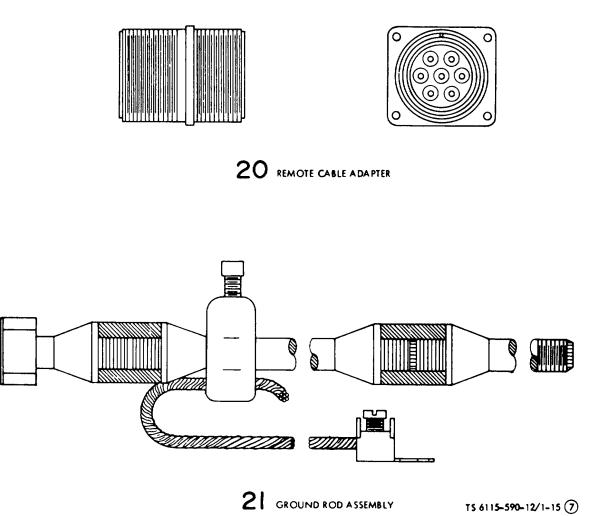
(7). Accessory Components (Sheet 7 of 7). (TS 6115-590-12/1-15<sup>7</sup>).
